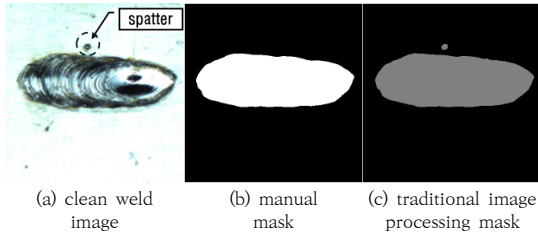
A segmentation mask result using traditional image processing techniques for a clean weld bead
